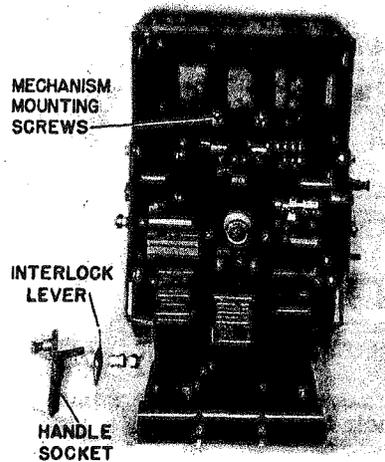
Arc Quenchers and Handle Socket Removed from Drawout Breaker
